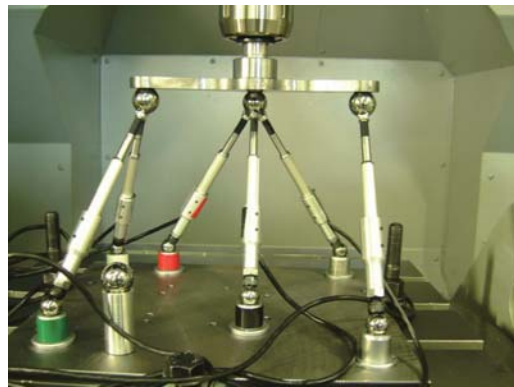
6-DOF parallel link mechanism for machine tool calibration [88].
